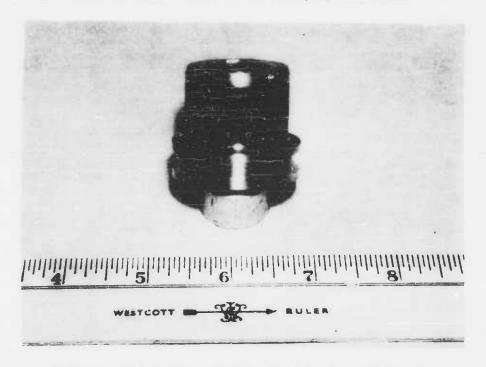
Sleeve Bearing Shaft - Type 316 Stainless Steel
